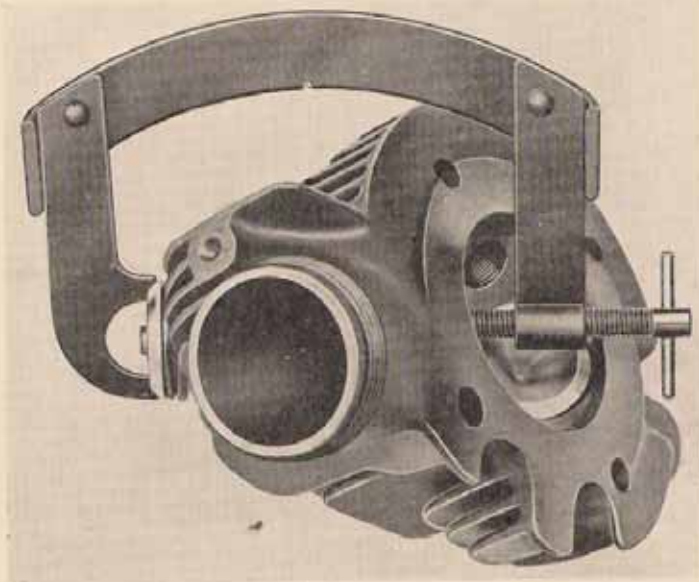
THE A.J.S. O.H. VALVE EXTRACTOR
